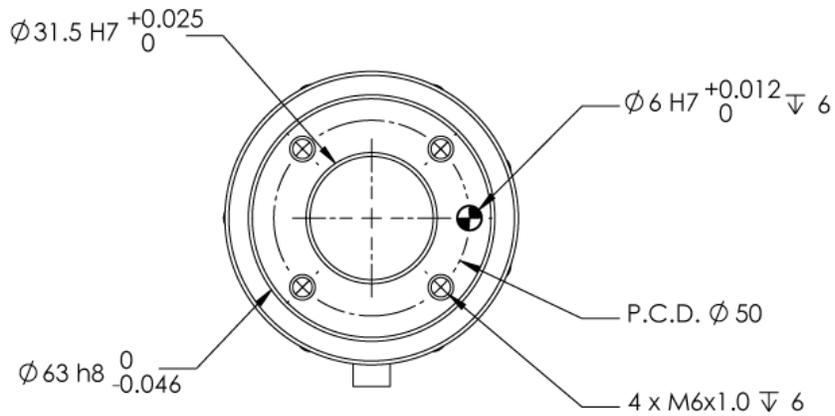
FT 300 Sensor tool side bolt pattern.
